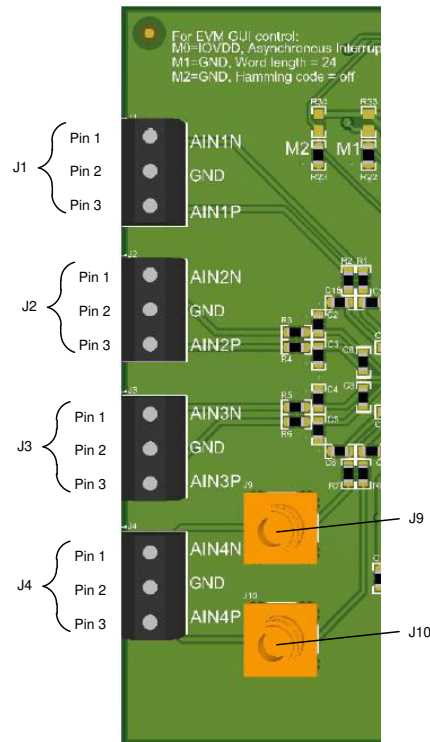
Input Terminal Blocks and Headers (PCB)
